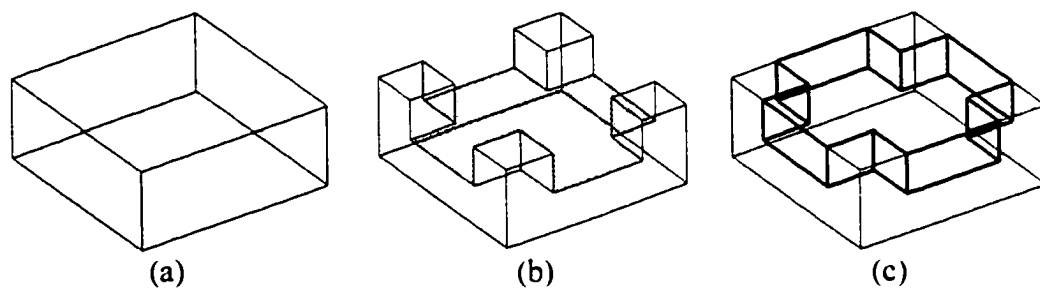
Primary feature: (a) raw material; (b) part, (the grayed face is the hint of a milling feature); (c) primary feature.
